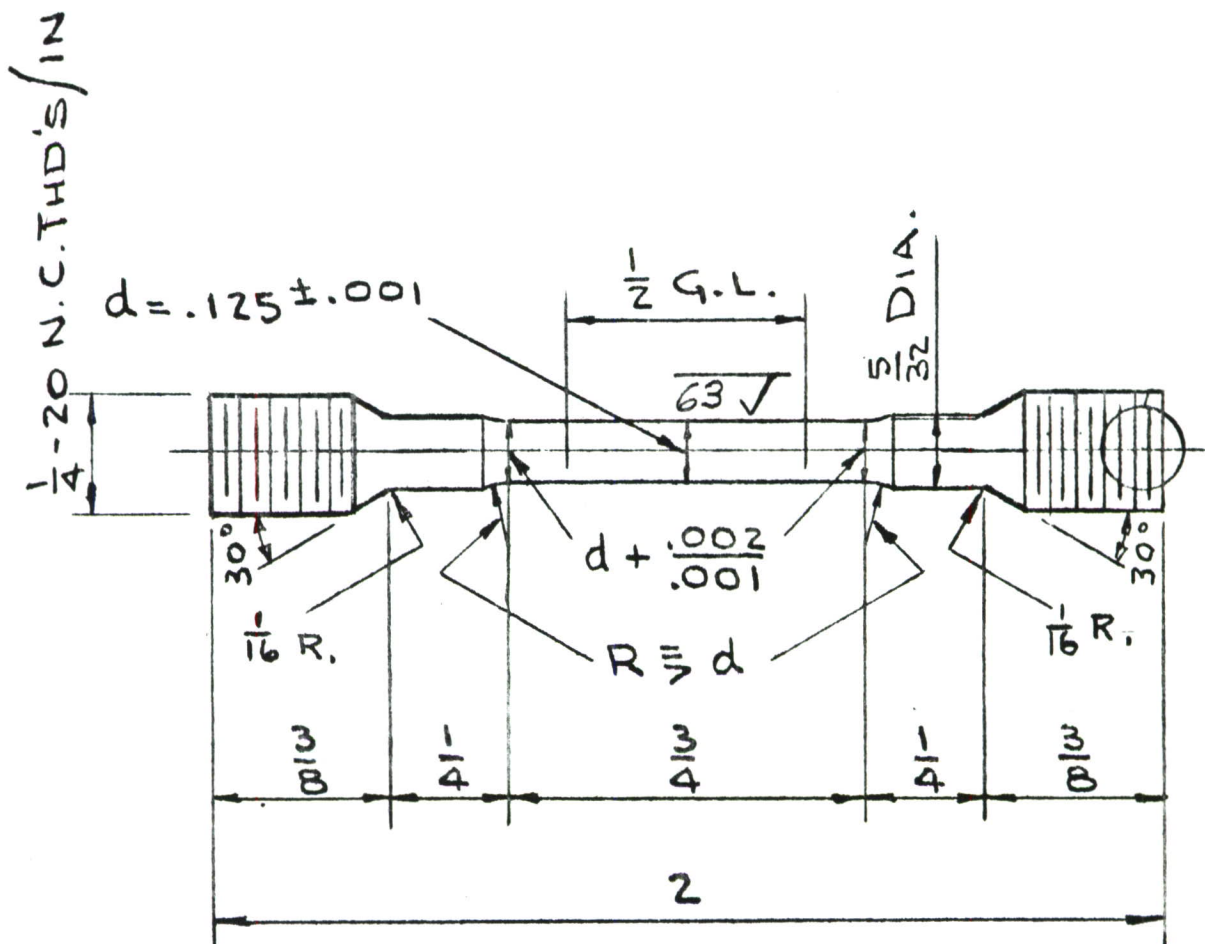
0.125-in. Diameter Tensile Specimen for Stress Corrosion Tests.
